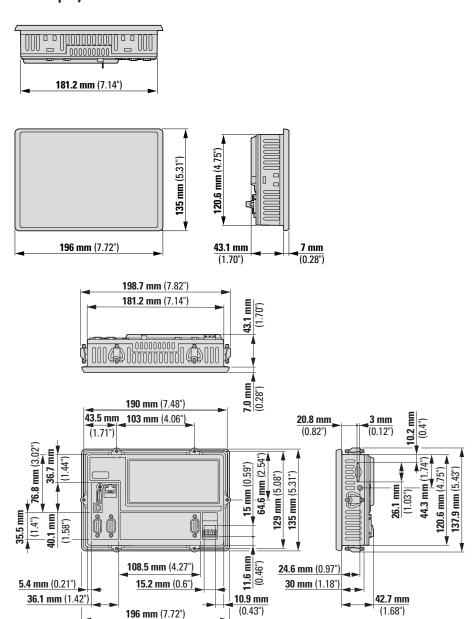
Dimensions for 7.0" front mounting devices in mm (inches)
